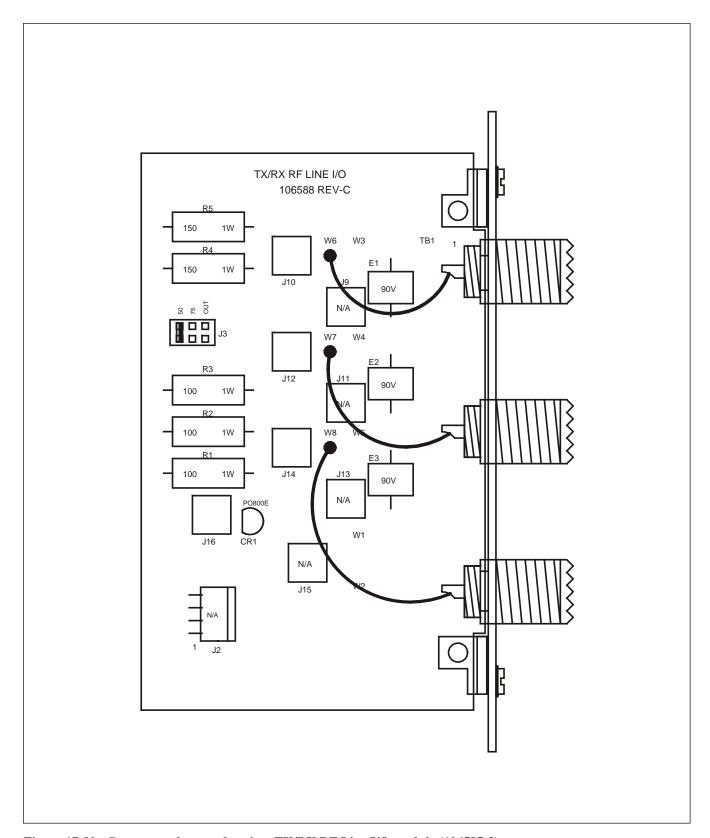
Component locator drawing, TX/RX RF Line I/O module (106585-3)
